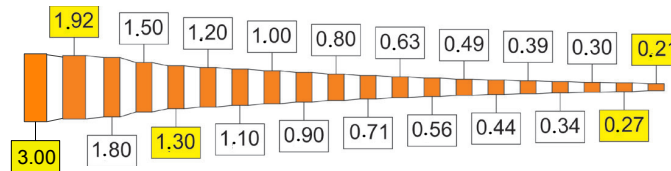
Drawing steps for manufacturing thin wires for wire A (lower) and wire B (upper); the heat treatment according to Tab. 2 was performed for the drawing steps marked in yellow.
